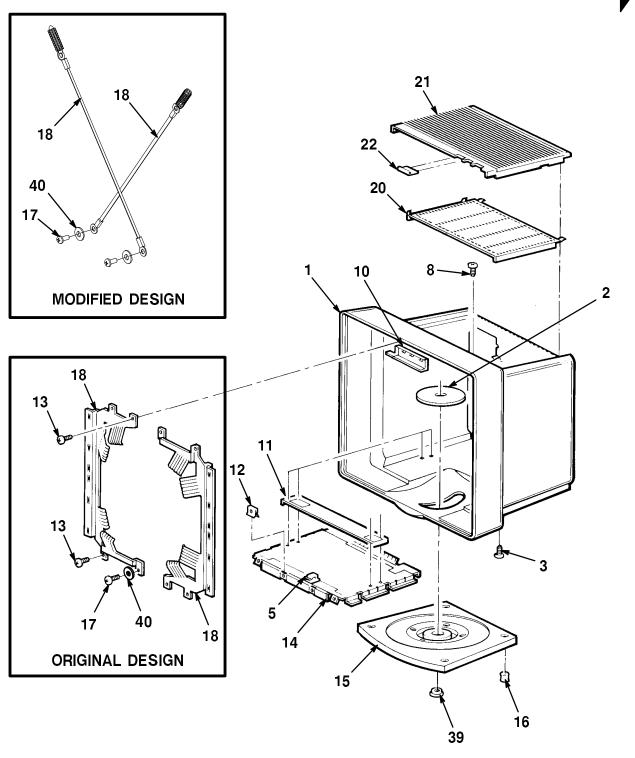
A. CRT/Chassis Assembly, VR319 (Sheet 2 of 2)
